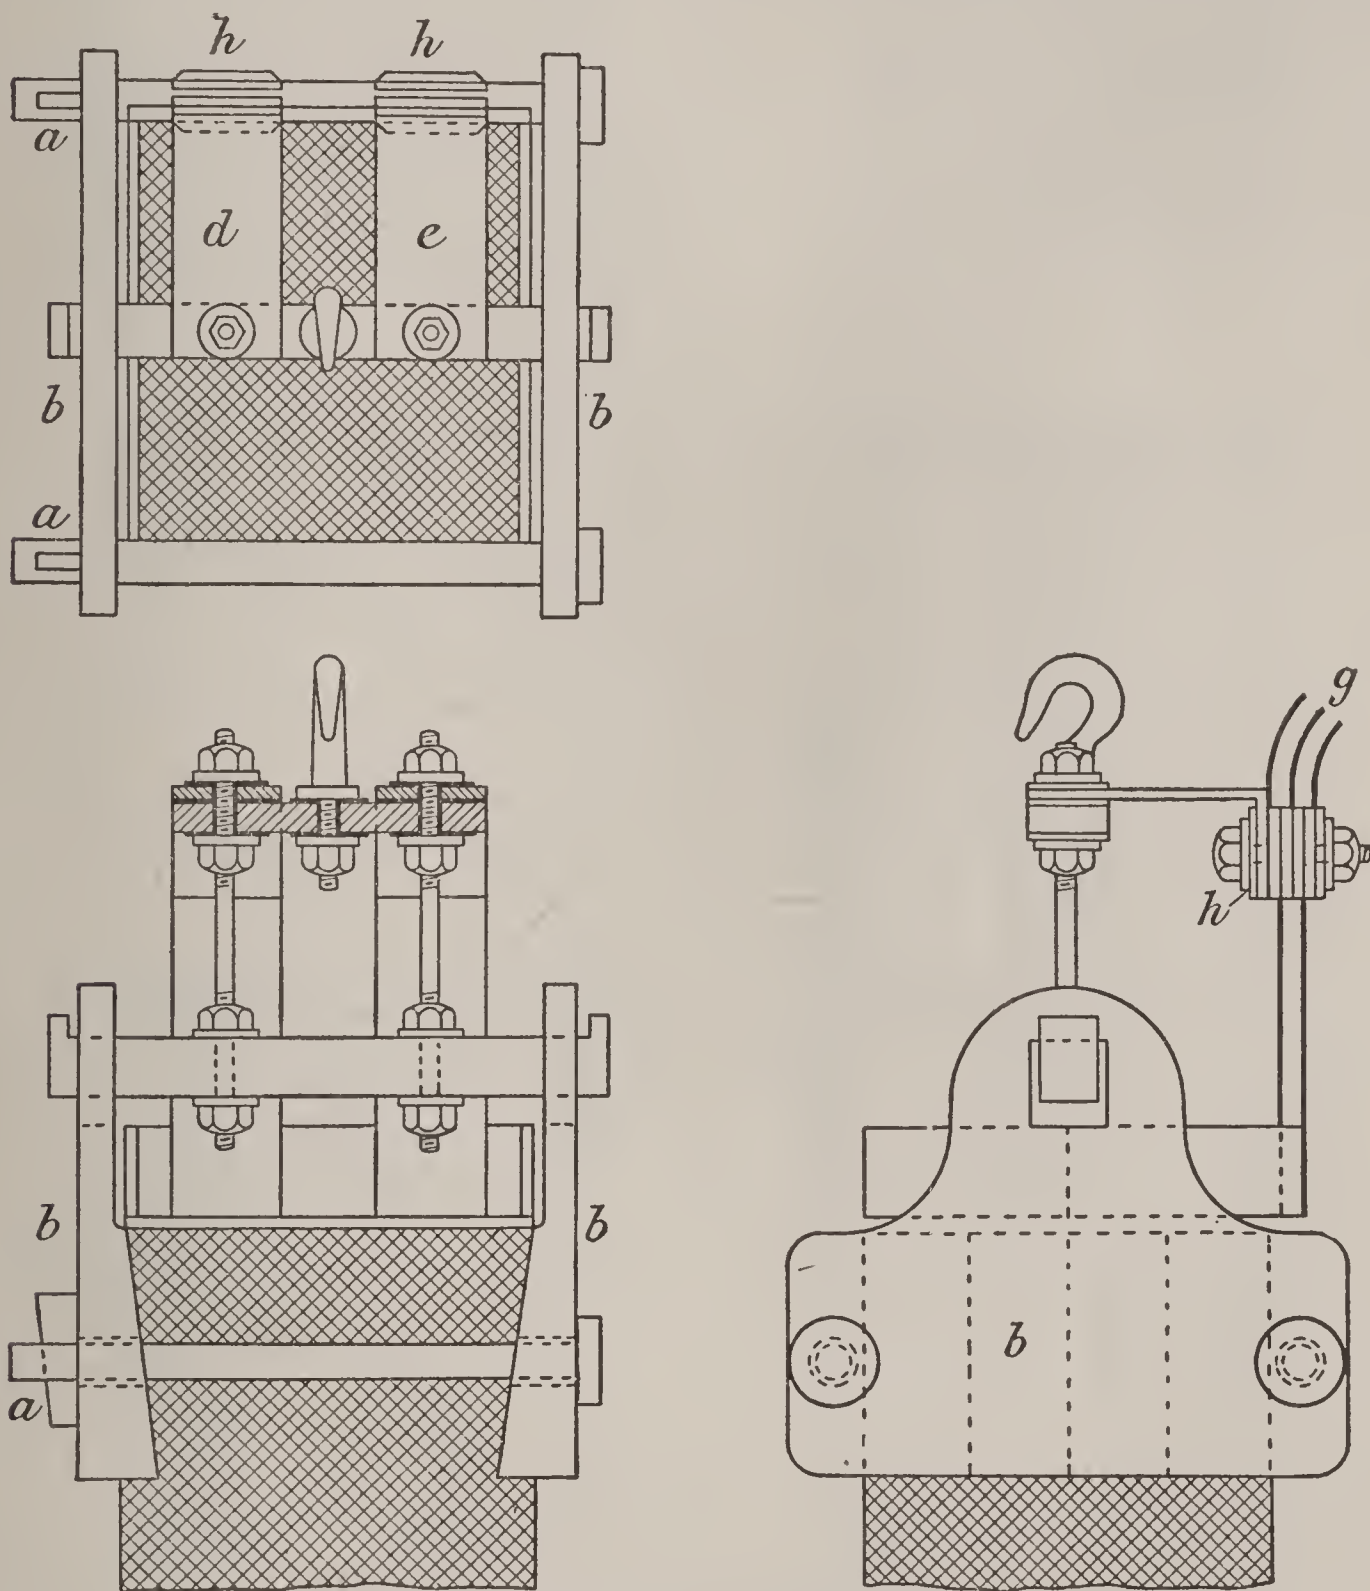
Detailed views of electrode holder satisfactorily used in carbide furnaces.
